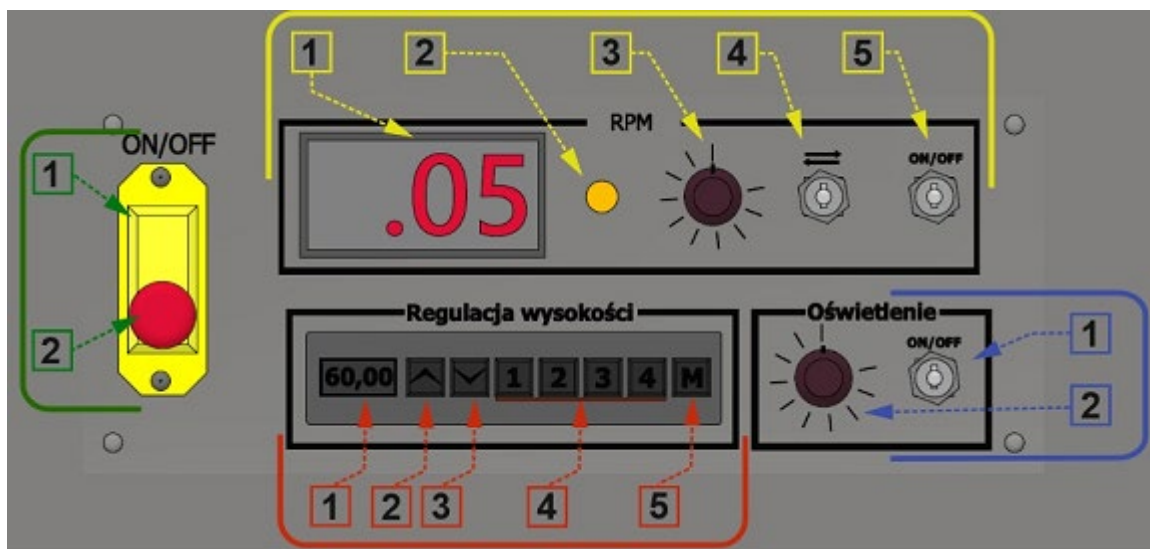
Control panel for the turntable, lighting and the height of raising or lowering the welding table
